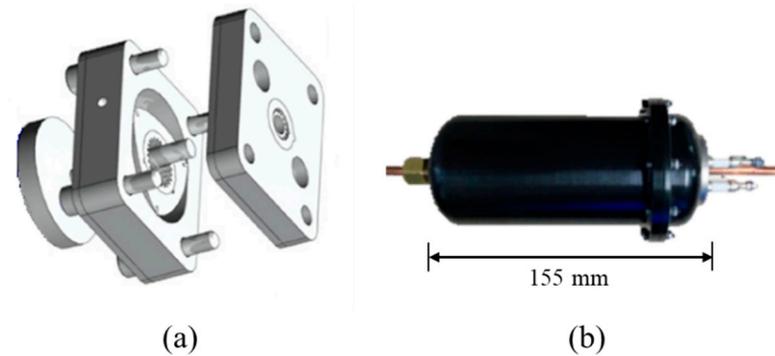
Prototypes of Wankel compressors: (a) flat-shaped design and (b) lightweight design.
